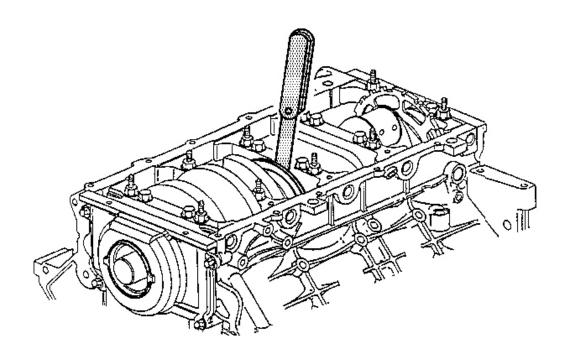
Measuring Crankshaft End Play Courtesy of GENERAL MOTORS CORP.
